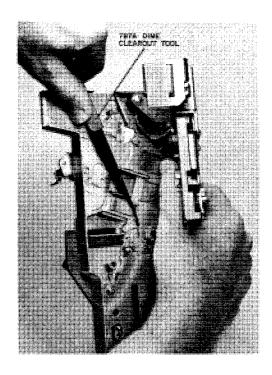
Using a 787A Dime Clearout Tool in Chute
